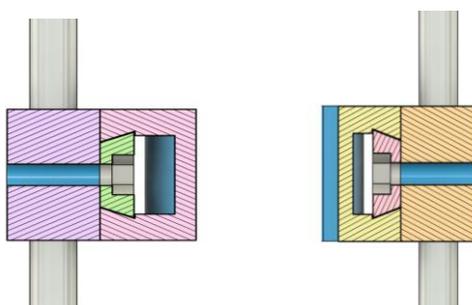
Sectional view of the adjustment mechanism for the lower exoskeleton fastenings in depth
